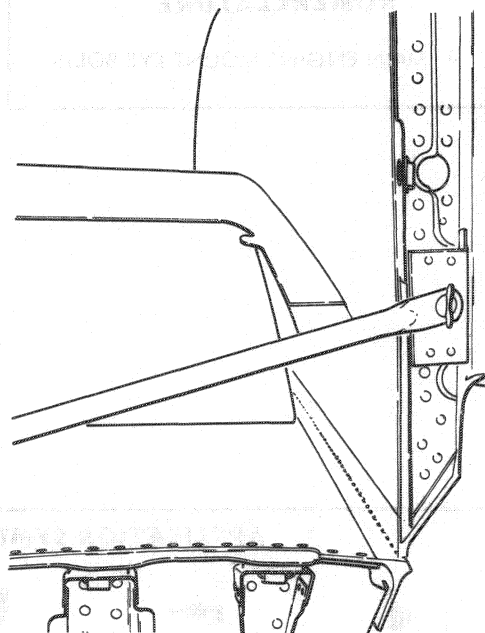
Main Engine Mount Eye Bolt Lubrication
